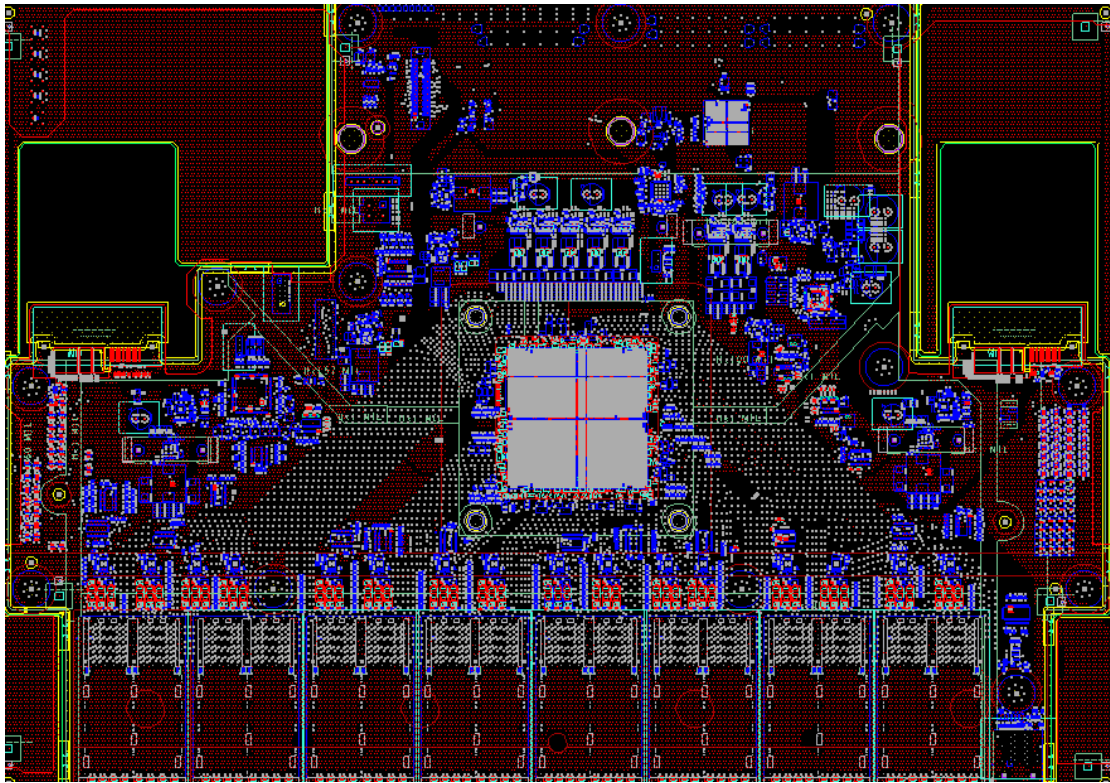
Inventec DCS7032Q28 Switch PCB Bottom View
